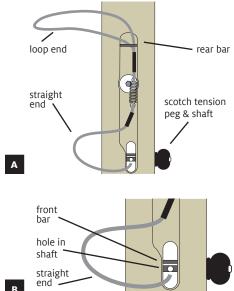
INSTALL SCOTCH TENSION SPRING AND STRING
